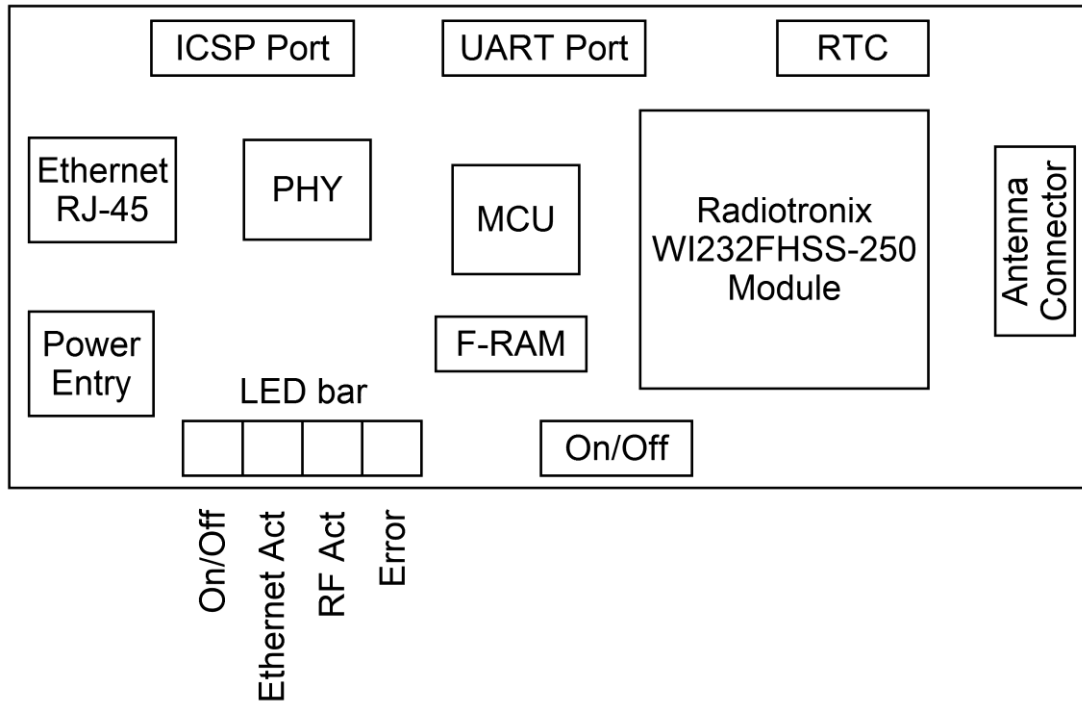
The placement of switch, connectors, indication LEDs and major parts on the top layer of the Base PCB.
